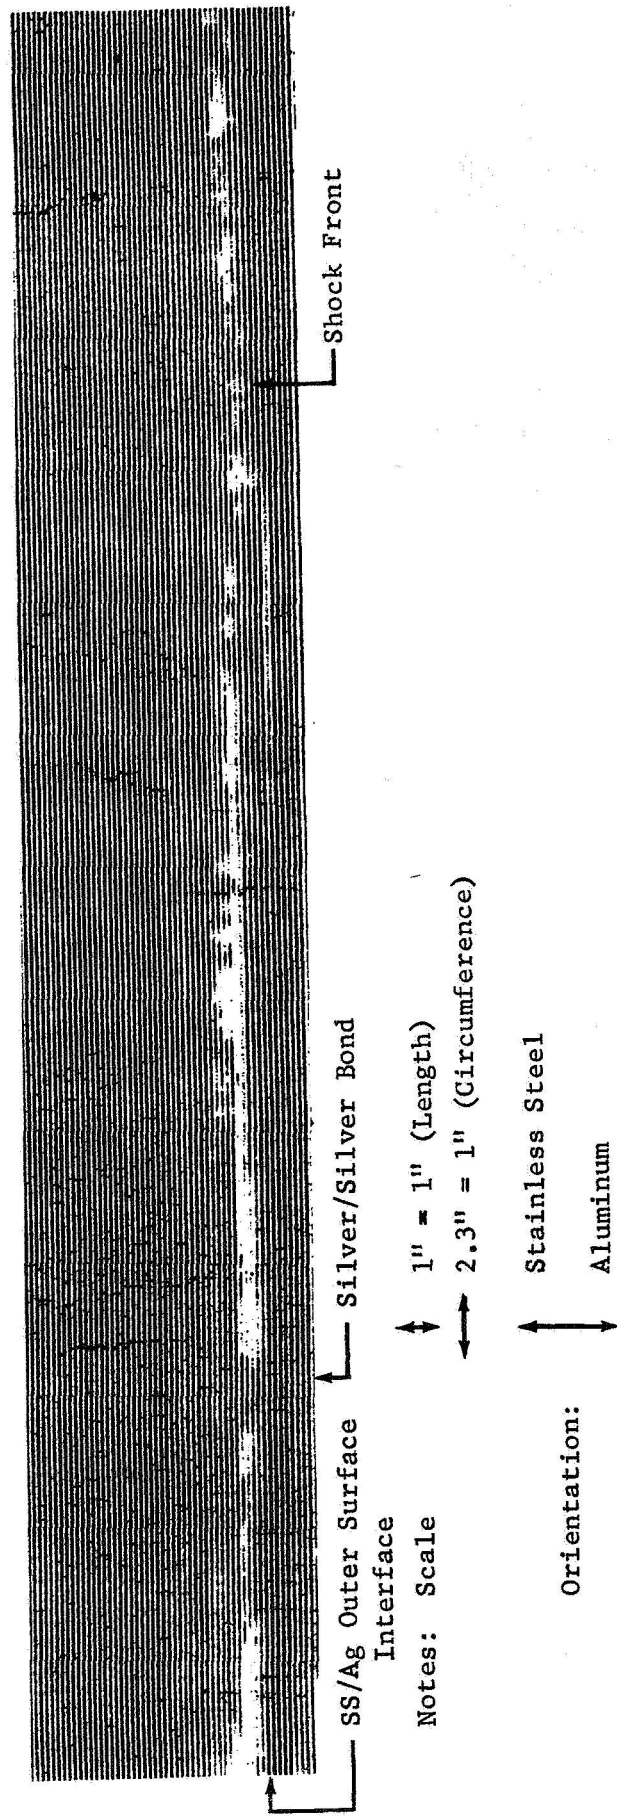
Ultrasonic Inspection Readout of Explosive Welded Joint-5,
